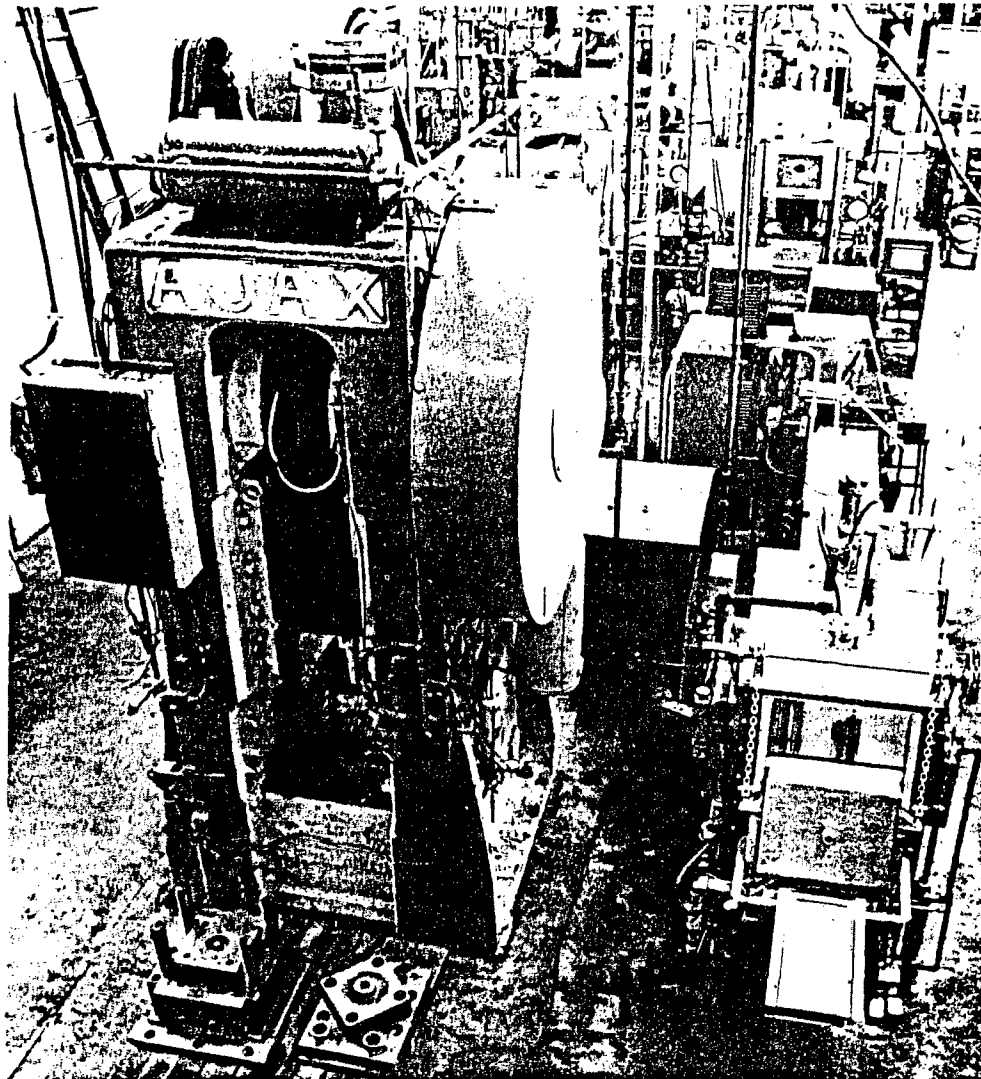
Ajax 700-Ton Crank Press and Lindbergh Atmosphere Sintering Furnace Used for P/M Forging.
